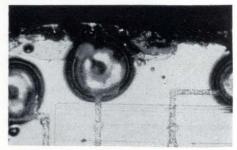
Excessive chipping and breaking, which exposes raw silicon
